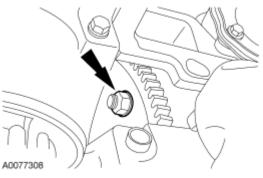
Locating Torque Converter Nuts Courtesy of FORD MOTOR CO.
